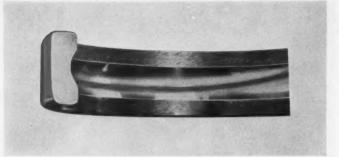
(Left) Misalignment of ball bearing may cause ball path to move from side to side as in this outer ring.
